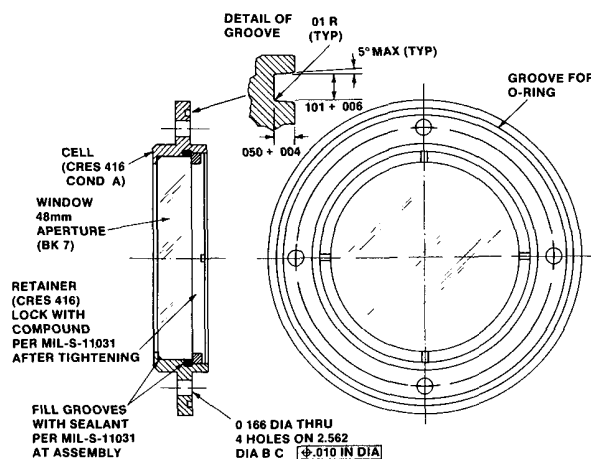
Example of a circular aperture window subassembly for a military telescope. The optic is held in place with a threaded retainer and sealed with an elastomer.
